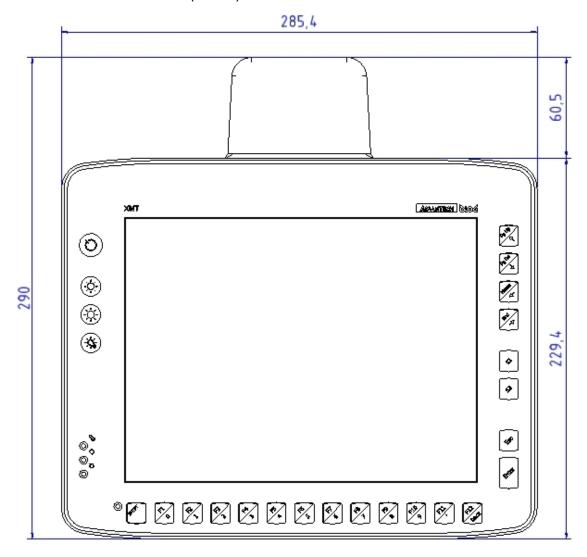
Dimensions DLoG XMT 5/10 front view
